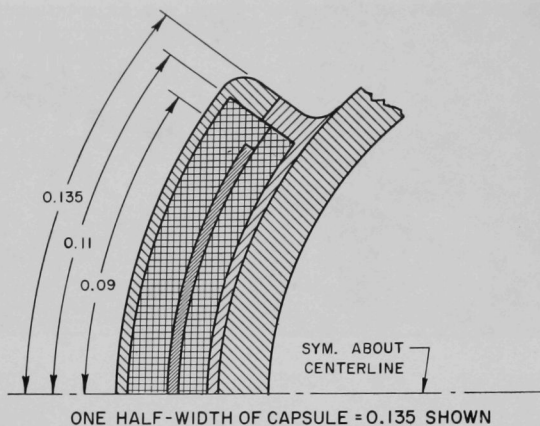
Cross-sectional View of Test Sample Assembly. ANL Neg. No. 112-6825 Rev. 2.
